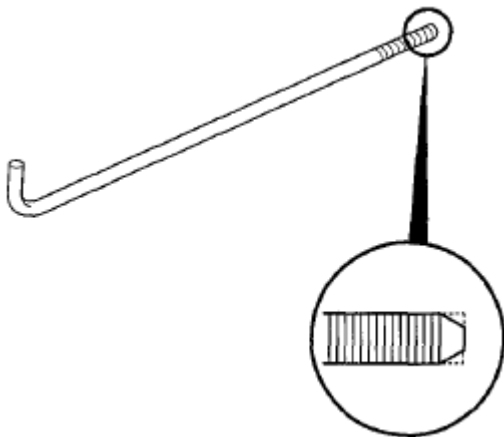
Identifying Grind Position Of Battery Clamp Bolts
